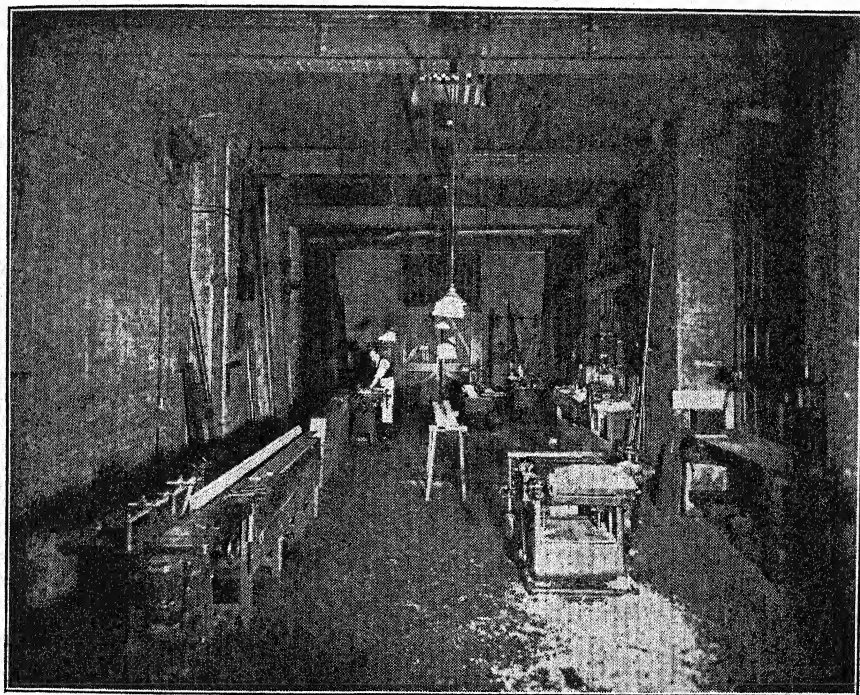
WOOD-WORKING MACHINE SHOP.
